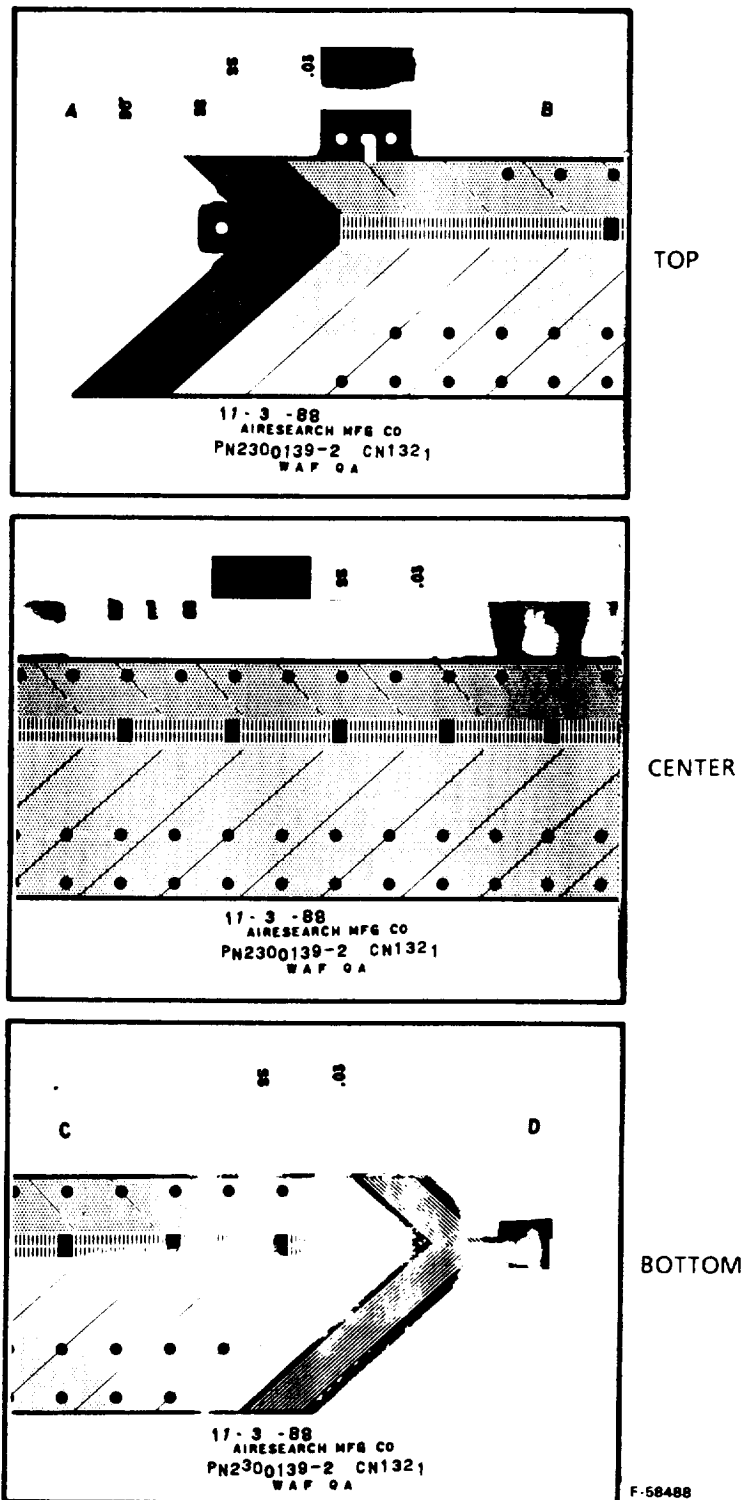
X-Ray of Brazed Full-Length Aft Coolant Jacket
